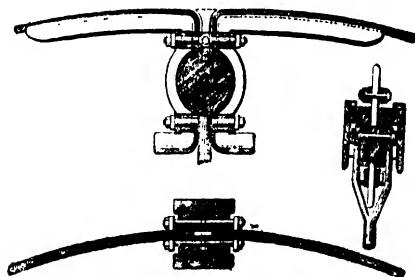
Insulator for Use on Telfer Line (side elevation, plan, and vertical cross section)
